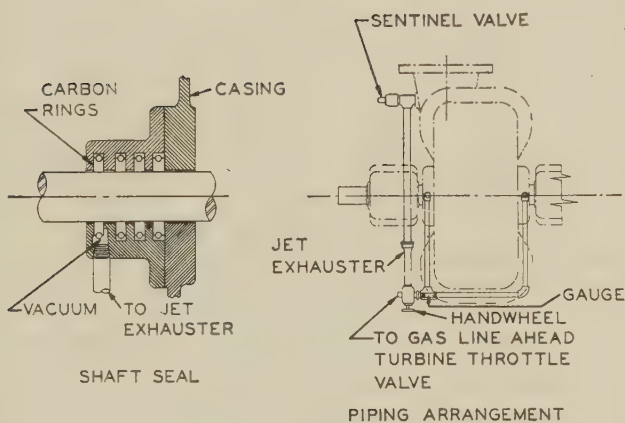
SHAFT SEAL AND PIPING ARRANGEMENT
